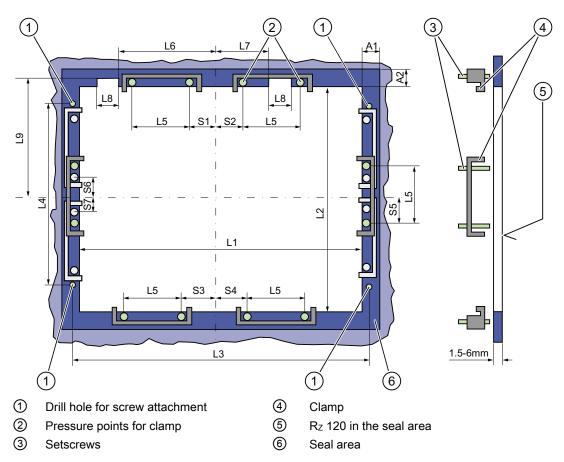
Drill holes for the screws and pressure points for the clamp screws
